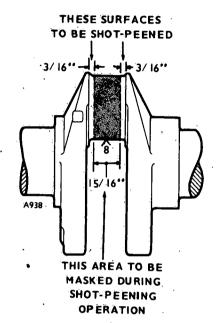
SHOT-PEENING THE CRANKSHAFT
